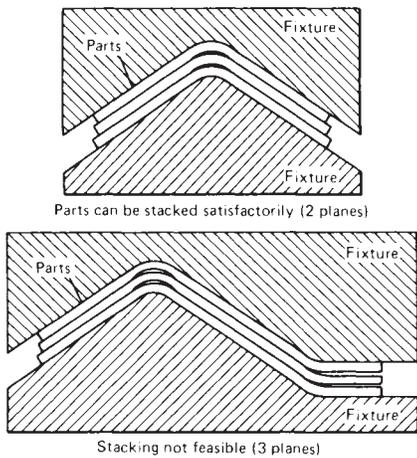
Parts that can and those that cannot be stacked in fixtures for the control of dimensional tolerances during aging
